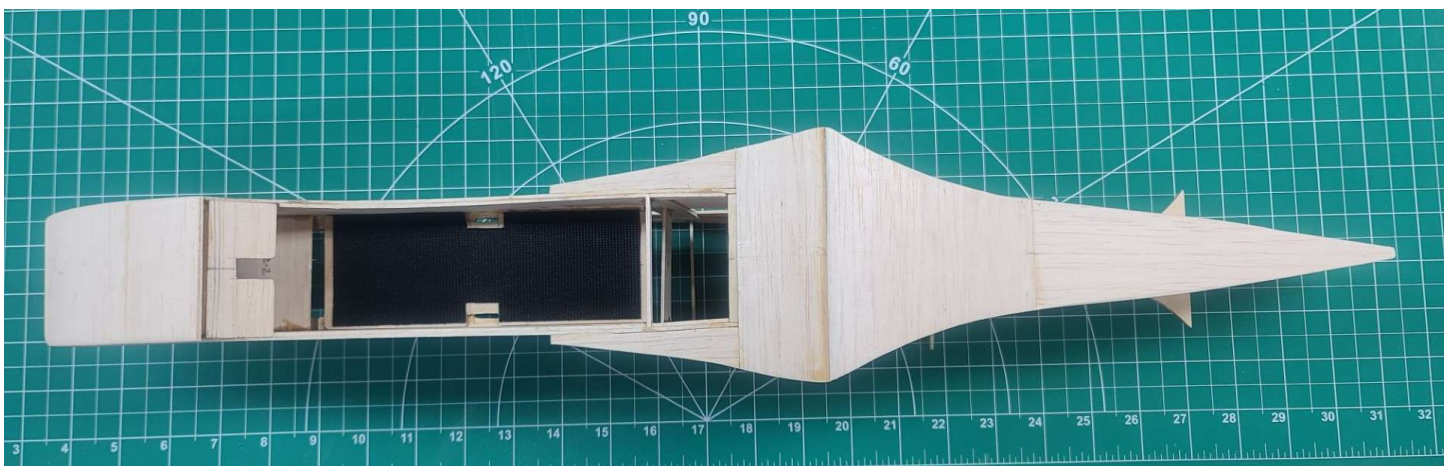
Fuselage Sides Joining - Second Step in Fuselage Assembly
